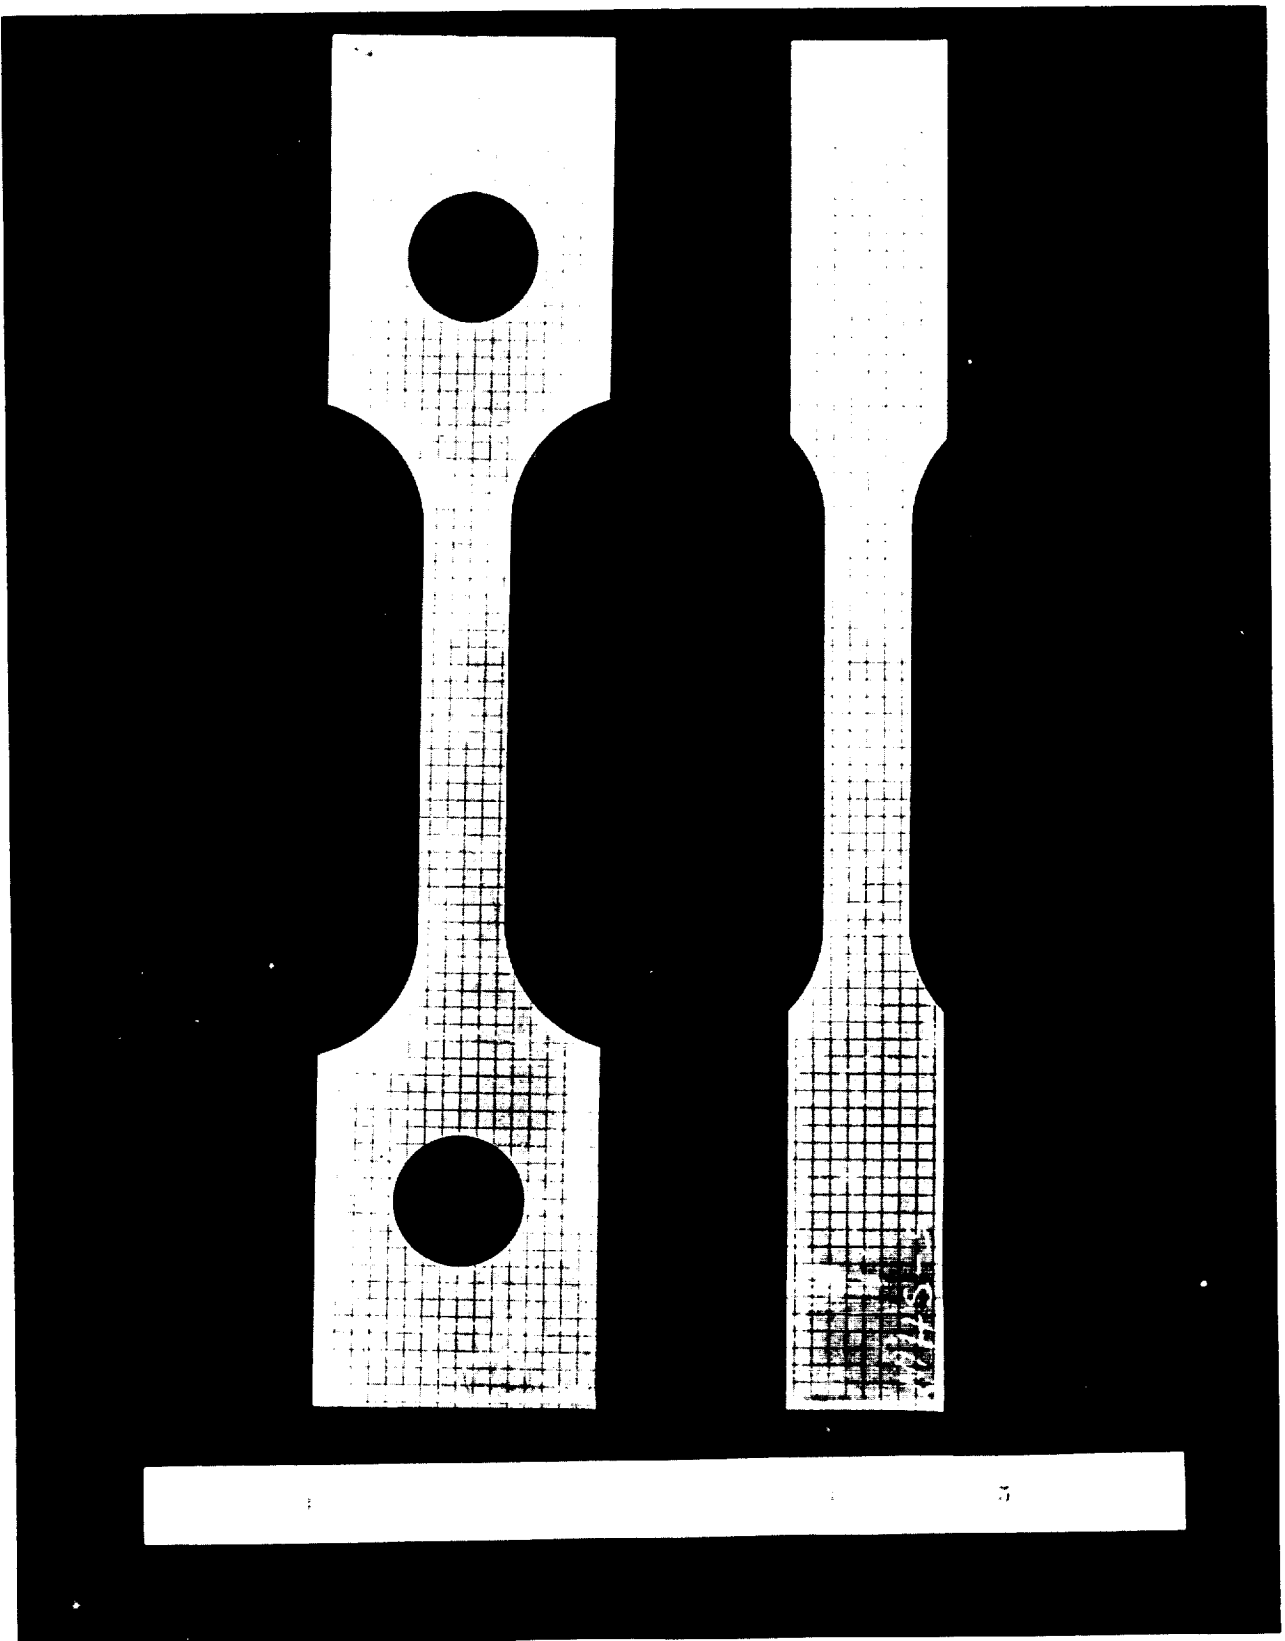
Tensile Specimens with a 0.100-in.-square (0.254 cm) Photogrid Pattern on their Surfaces
